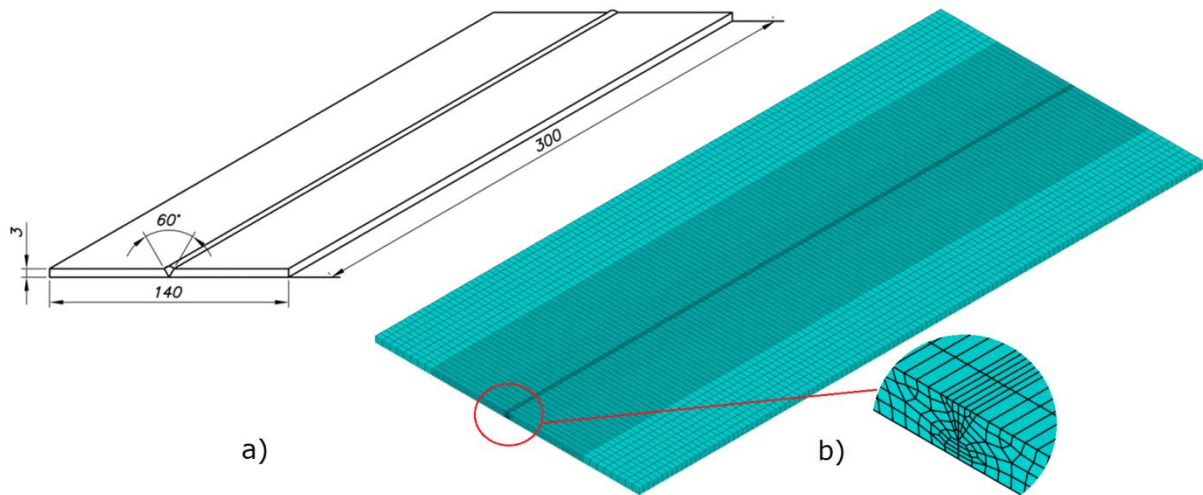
Geometric model. a) Dimensions. b) Mesh and a detail of the weld bead zone.
